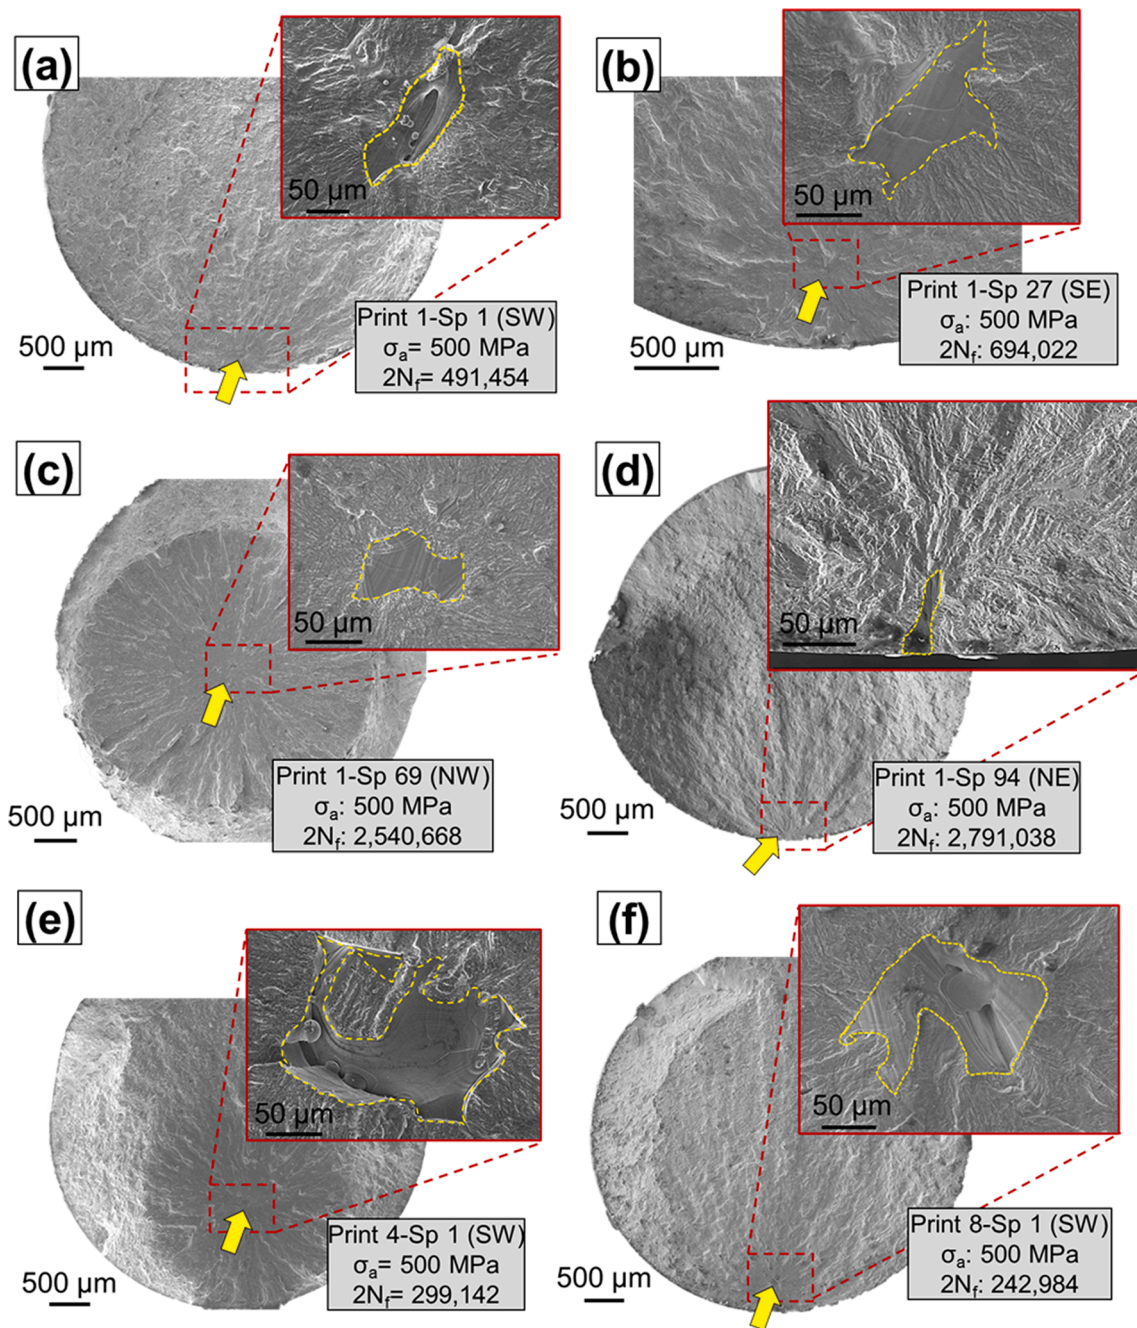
Fracture surfaces of fatigue specimens including (a) Print 1-Sp1, (b) Print 4-Sp1, (c) Print 8-Sp1, (d) Print 1-Sp27, (e) Print 1-Sp 69, and (f) Print 1-Sp 94. All specimens were tested at 500 MPa stress amplitude. The fatigue life corresponding to each specimen is labeled on each figure. The yellow arrows indicate the crack initiation sites, and the crack-initiating defects are enclosed by yellow dashed lines in the zoomed-in images. (For interpretation of the references to color in this figure legend, the reader is referred to the web version of this article.)
